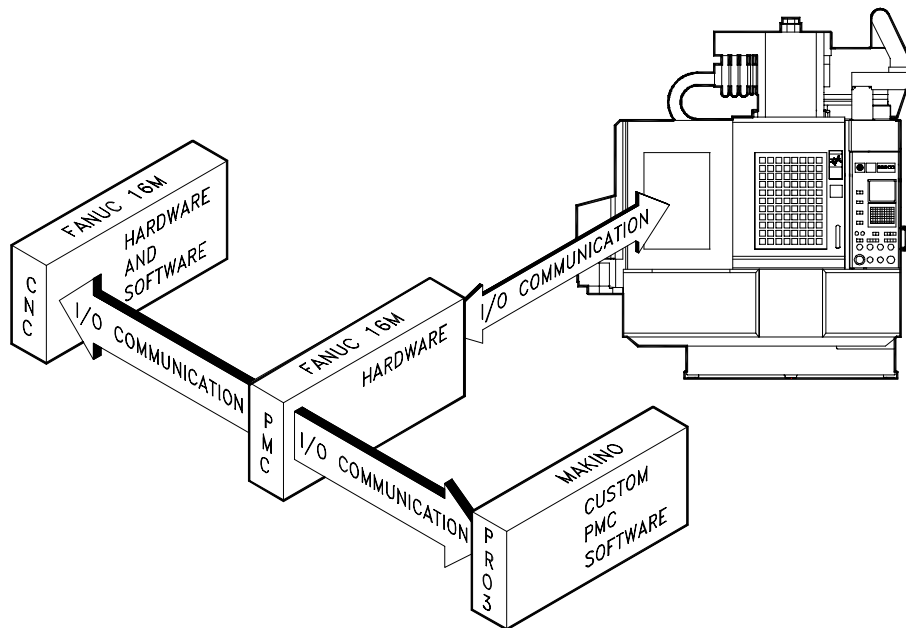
MACHINE TOOL SYSTEM INTERFACE
